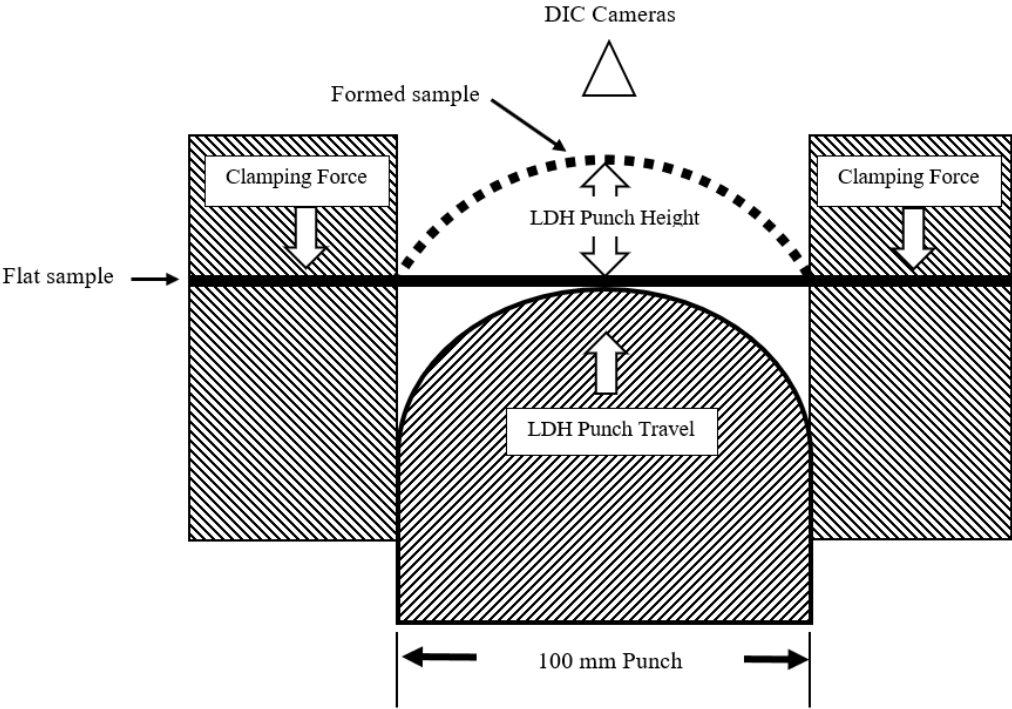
Cross Section of LDH and Bi-axial Stretch Test Tooling
